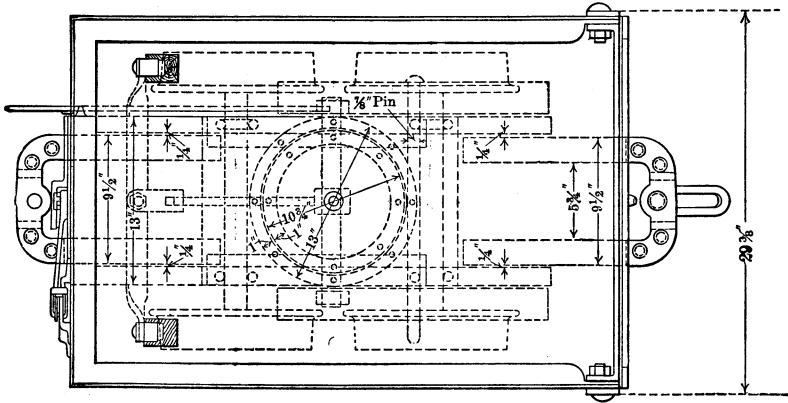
Tunnel car used in Laramie-Poudre Tunnel, plan.
